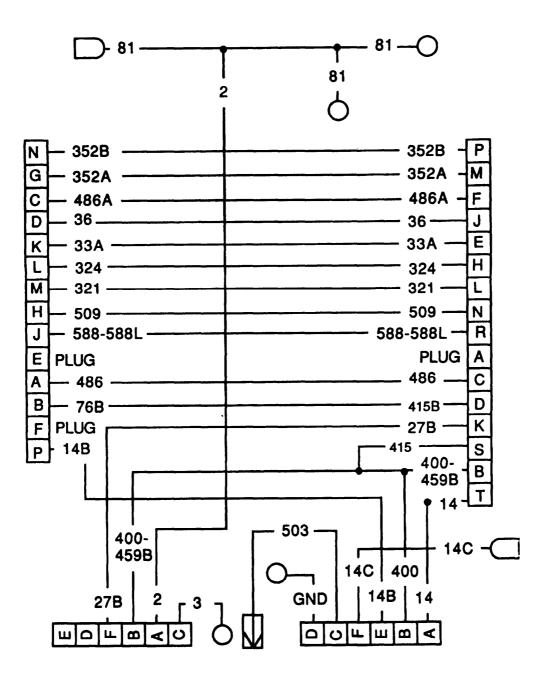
Engine Disconnect Bracket To Drivers Bulkhead Wiring Harness (12268418-1)
